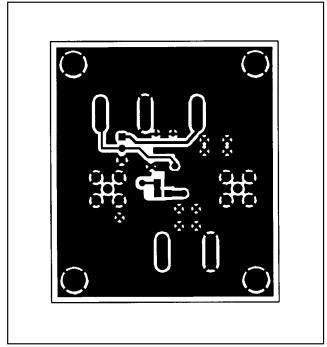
MAX4278 EV Kit Board Layout—Solder Side
